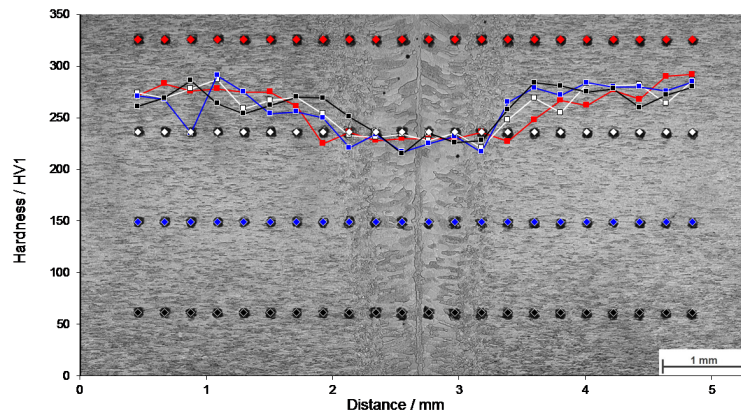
EB weld of 5 mm TZM with cored wire filler
